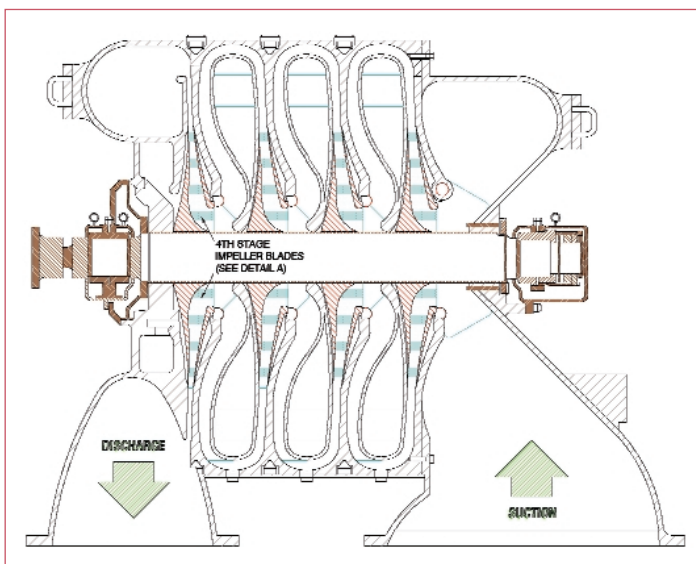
Outline drawing of the compressor showing the four impeller stages.
